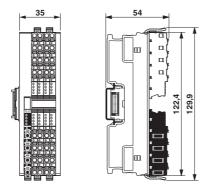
Nominal dimensions of the H housing with two terminal fields (type 2H, e.g., AXL F DI16/1 DO16/1 2H)
